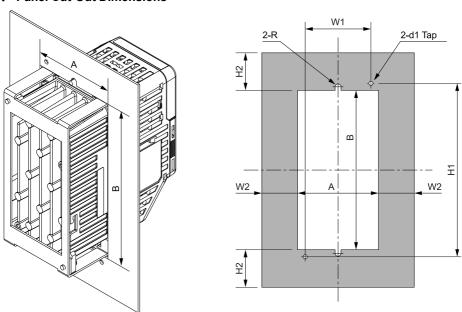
Panel Cut-Out Dimensions Diagram 1
